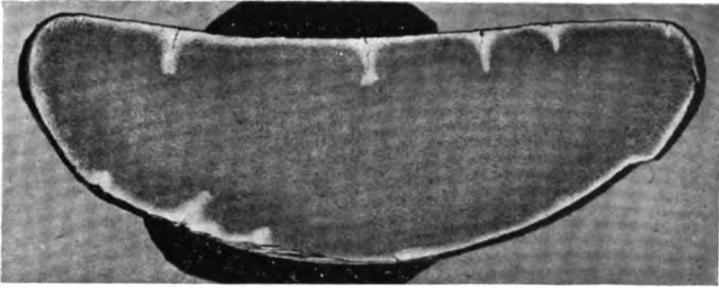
A.—TRANSVERSE SECTION OF STEEL BAR SHOWING ROAKS.
